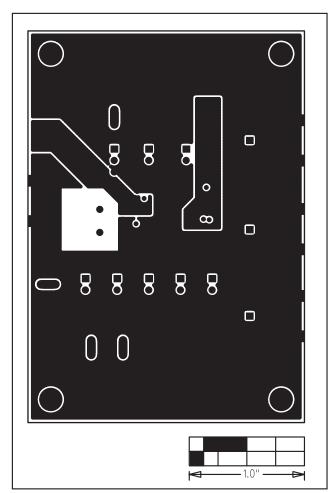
MAX9485 EV Kit PC Board Layout—Solder Side
